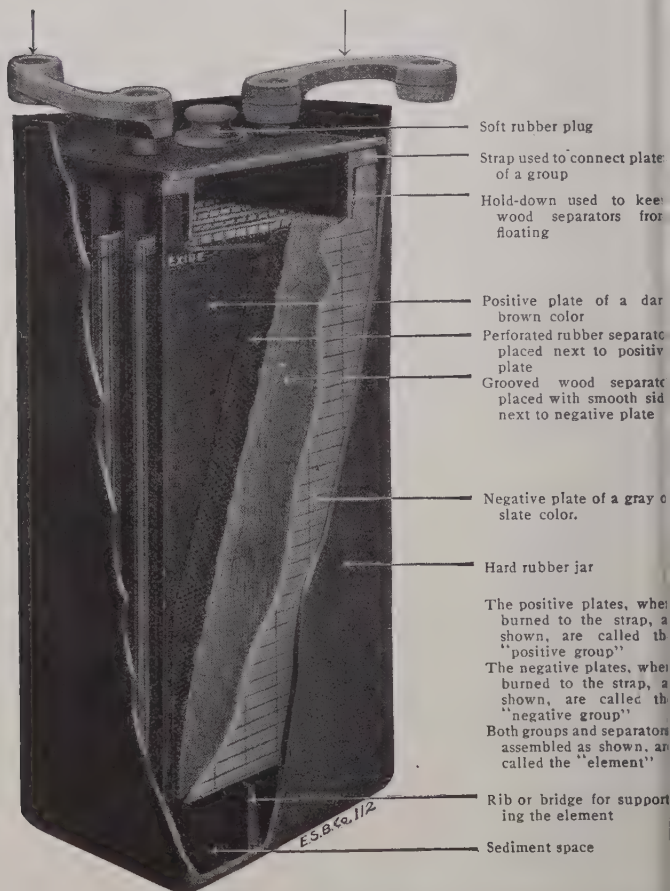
One 9-MV "Exide" Cell, Showing Parts Used and Method of Assembly
